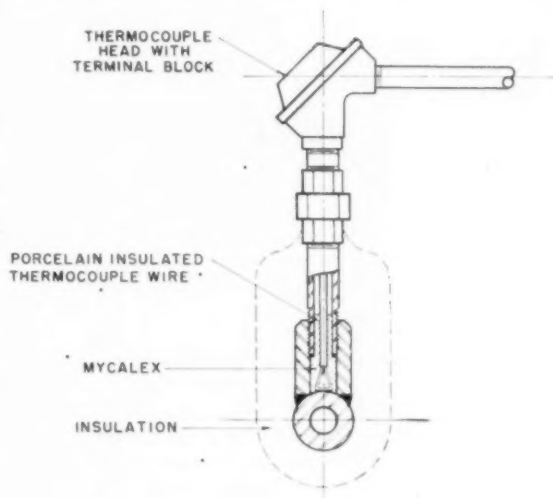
SKIN-TYPE THERMOCOUPLE ASSEMBLIES
